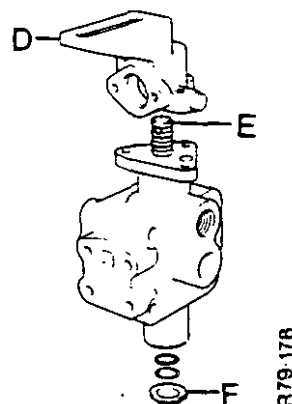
DISASSEMBLY OF THE THREE-WAY VALVE
